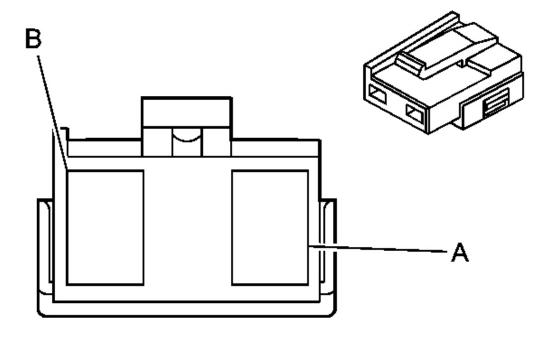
Lumbar Pump Motor - Passenger (AG2) Connector End Views Courtesy of GENERAL MOTORS CORP.
